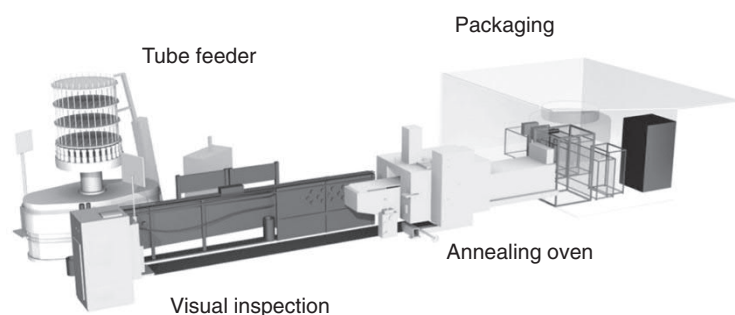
Schematic representation of a glass container production line. Different manufacturing and inspection systems are shown, including a tube feeder, a rotating manufacturing stage, optical inspection devices, and an oven.
